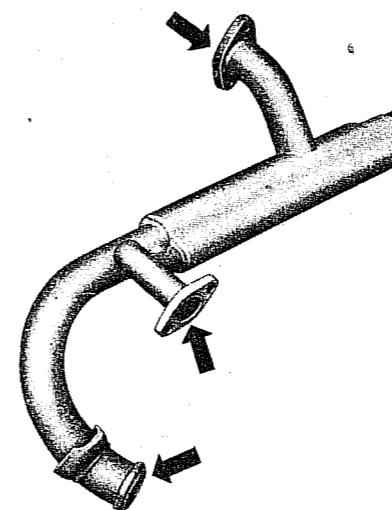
Check the manifold flange at points shown for cracks and distortion - 1200 models only.
